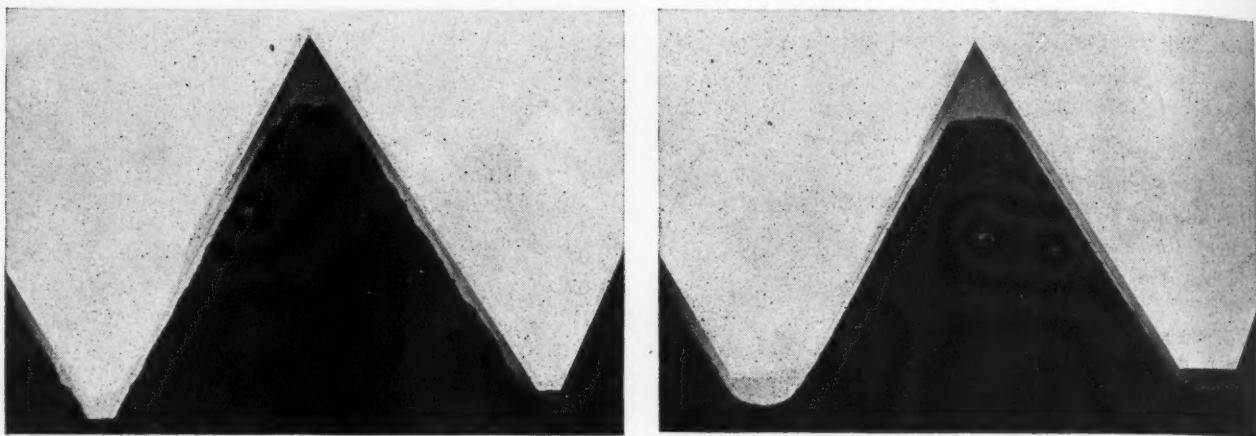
Commercial Threads on Set-screws Selected at Random. View to the Left Shows a Cut Thread; View to the Right, a Ground Thread
